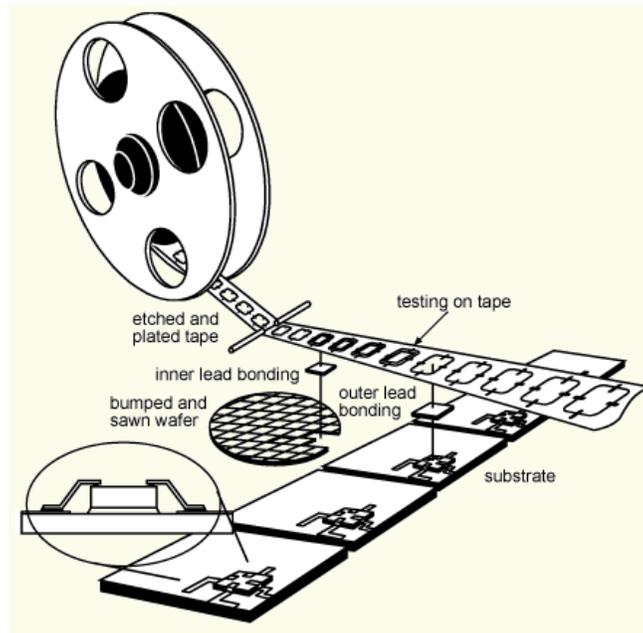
Schematic of a Farco 'bumped' wafer TAB processing machine
